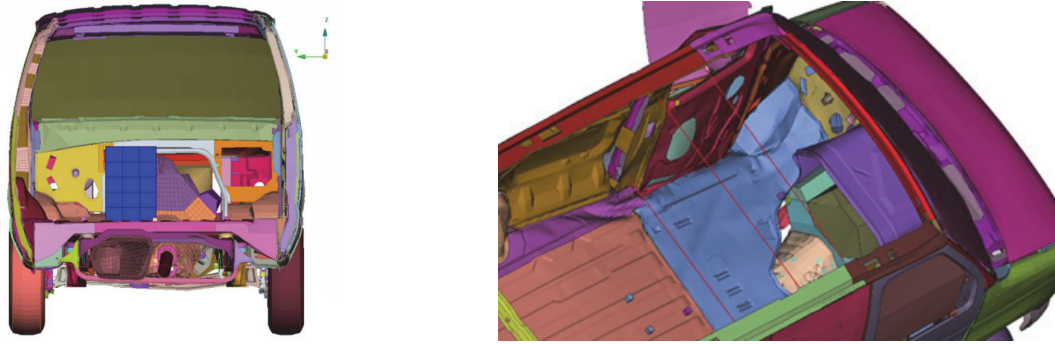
Inner parts front view (Left Image)/ Ford Econoline front inner body beam parts view (Right Image)
